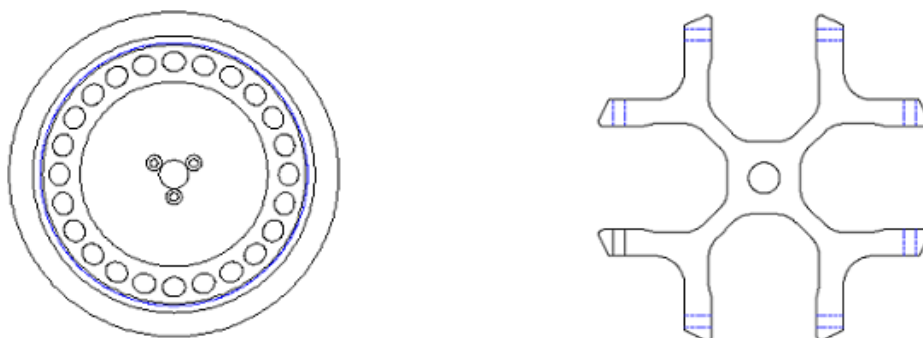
Angle Rotor (left), Swing-out Rotor (right)
